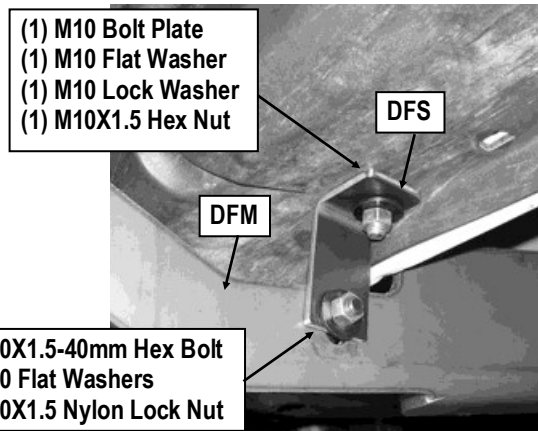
Driver Front Mounting Bracket (DFM) Installed
